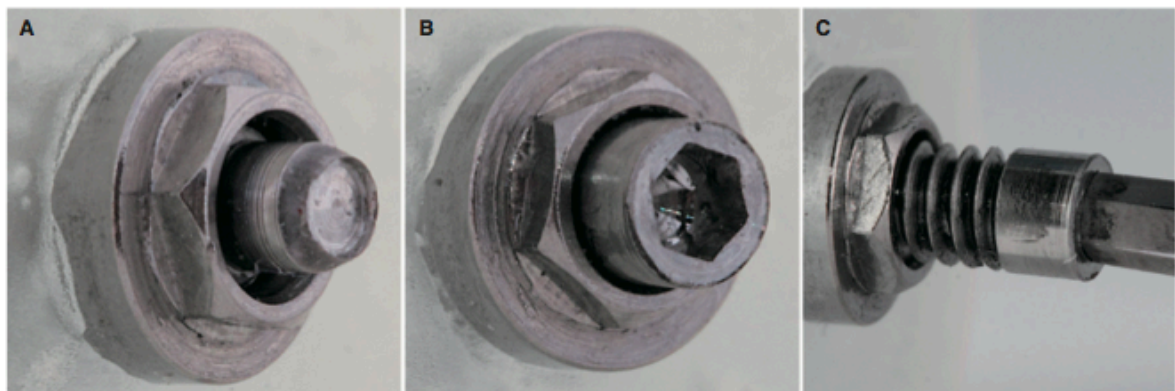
Details of prototype screw design. (A) Control screw fragment after fracture. (B) Prototype 5 screw fragment after fracture. (C) A 1.25 mm screwdriver inserted into the socket head cap of the fractured Prototype 5 screw fragment.
